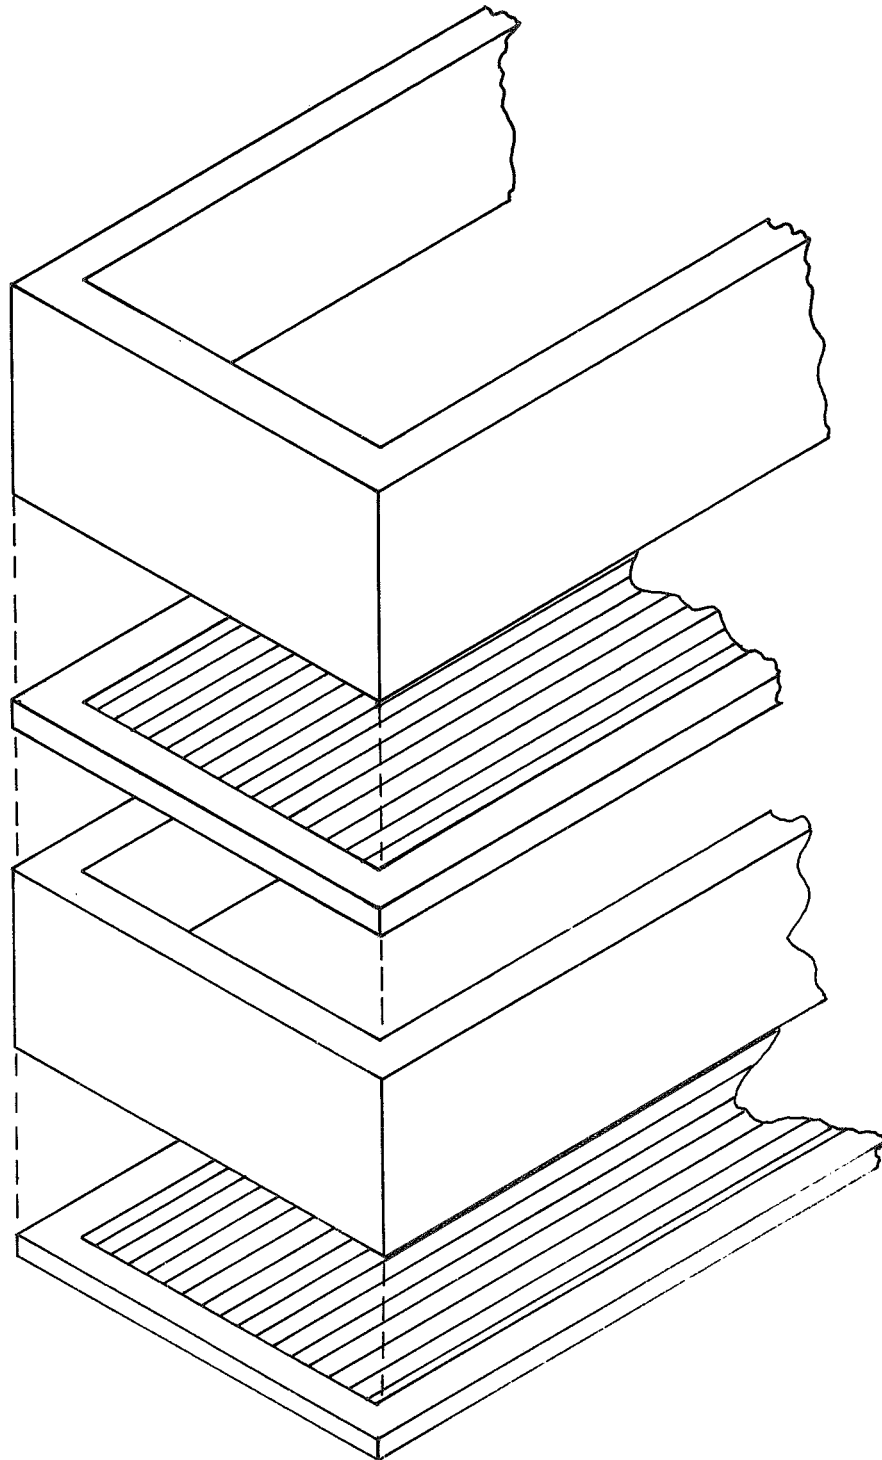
LAD Collimator, Appropriate Spacers Providing Sandwich-Type Construction Arrangement
